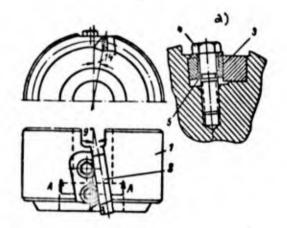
Design of Carbide-Tipped, 110 - 150 mm Diameter Inserted Tooth End-Milling Cutter
